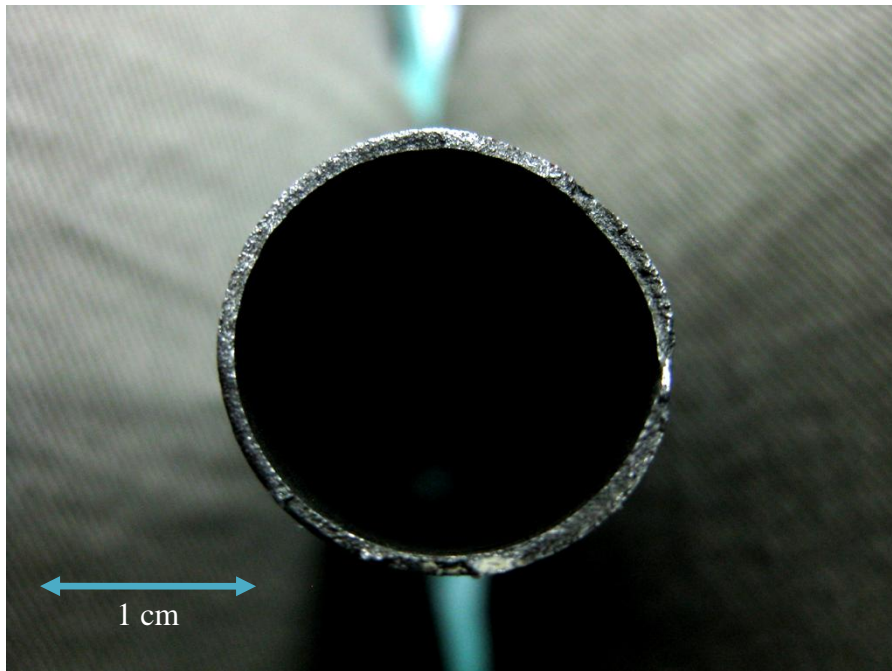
Close view on fracture surface of the stainless steel tubing.
